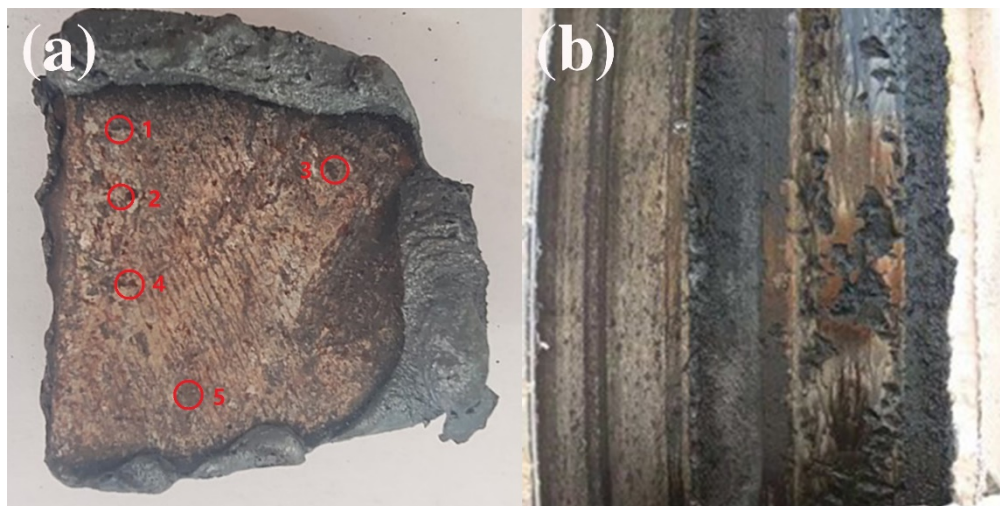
(a) Rolling ring sampling piece, (b) Surface of the rolling ring after corrosion
